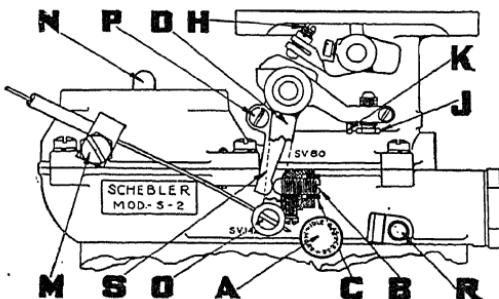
Service Drawing of Schebler Model "S" Carburetor
